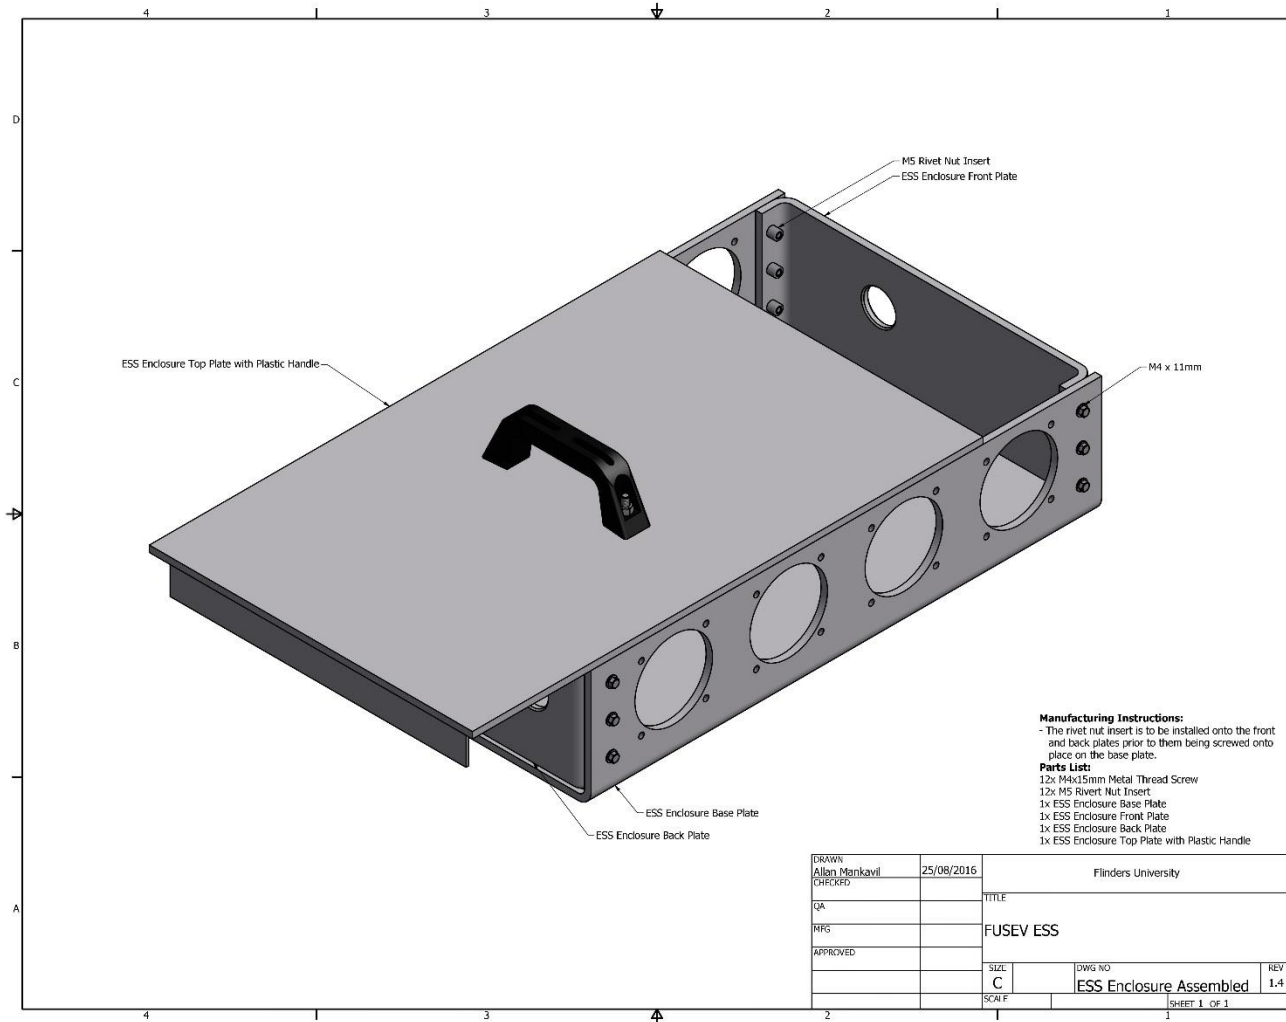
The mechanical drawing of the Assembled ESS Enclosure.
